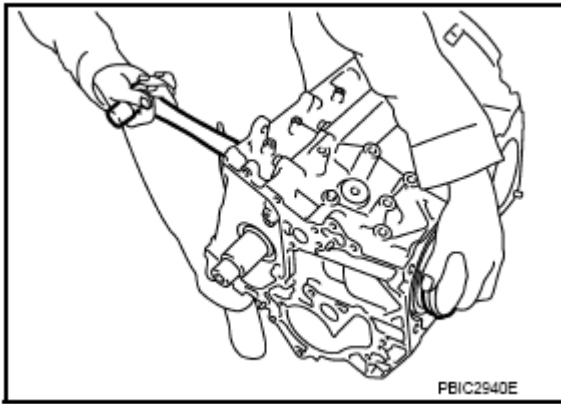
Removing Piston And Connecting Rod Assembly Using Hammer Handle
